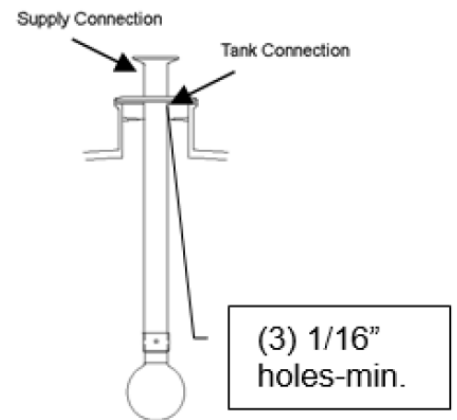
Supply Tube Holes for Cleanout of Inlet Fitting
